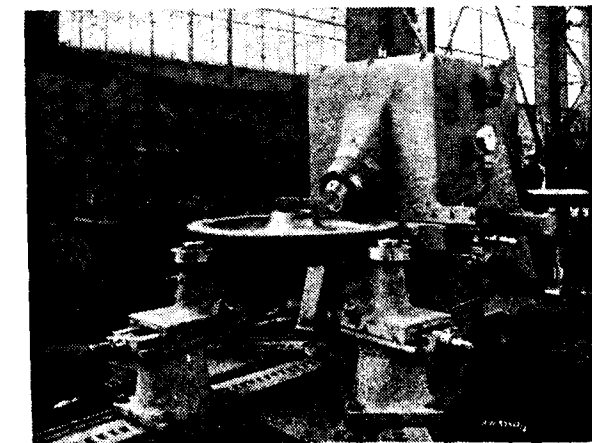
Type XW Retaining Ring rolling-in Machine.
